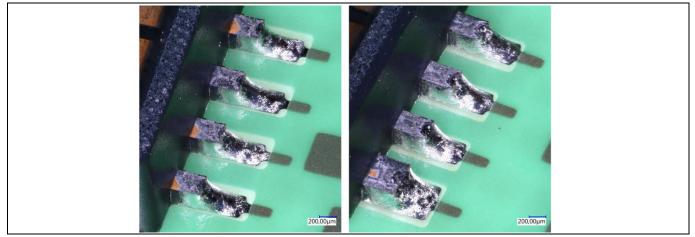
Examples of properly soldered DFN pressure sensor package terminations with hollow groove LTI inspected by optical microscopy.
